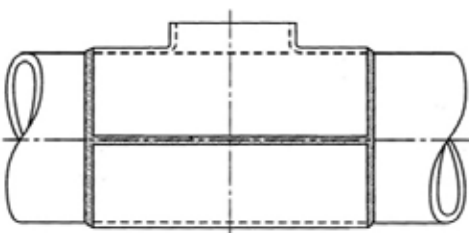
Fillet welding of pipe sleeve ends
